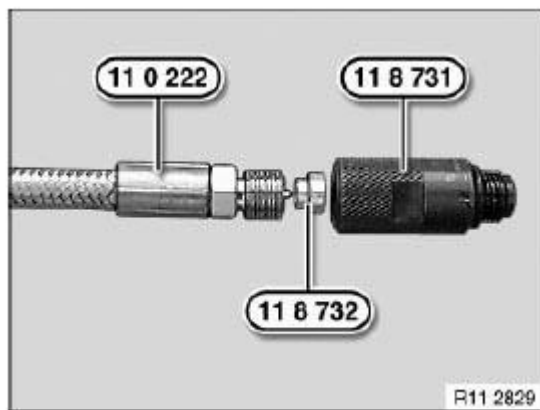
Identifying Special Tool 11 0 222, 11 8 732 And 11 8 731
